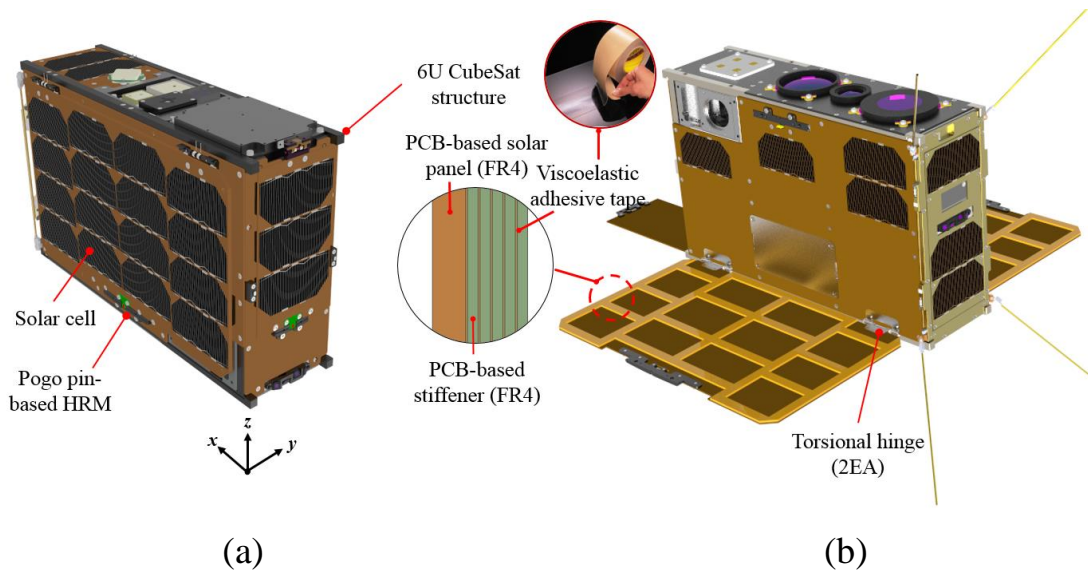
Mechanical Configuration of STEP Cube Lab-II: (a) Solar Panel Stowed and (b) Solar Panel Deployed.
